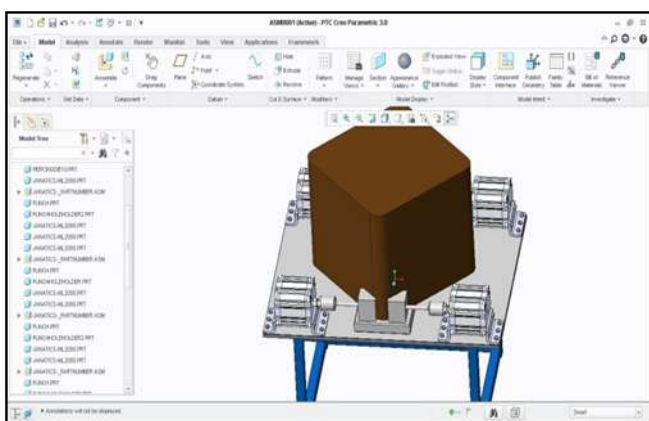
CAD Model for Pneumatic Punching Machine (Square Drum Mounted)
